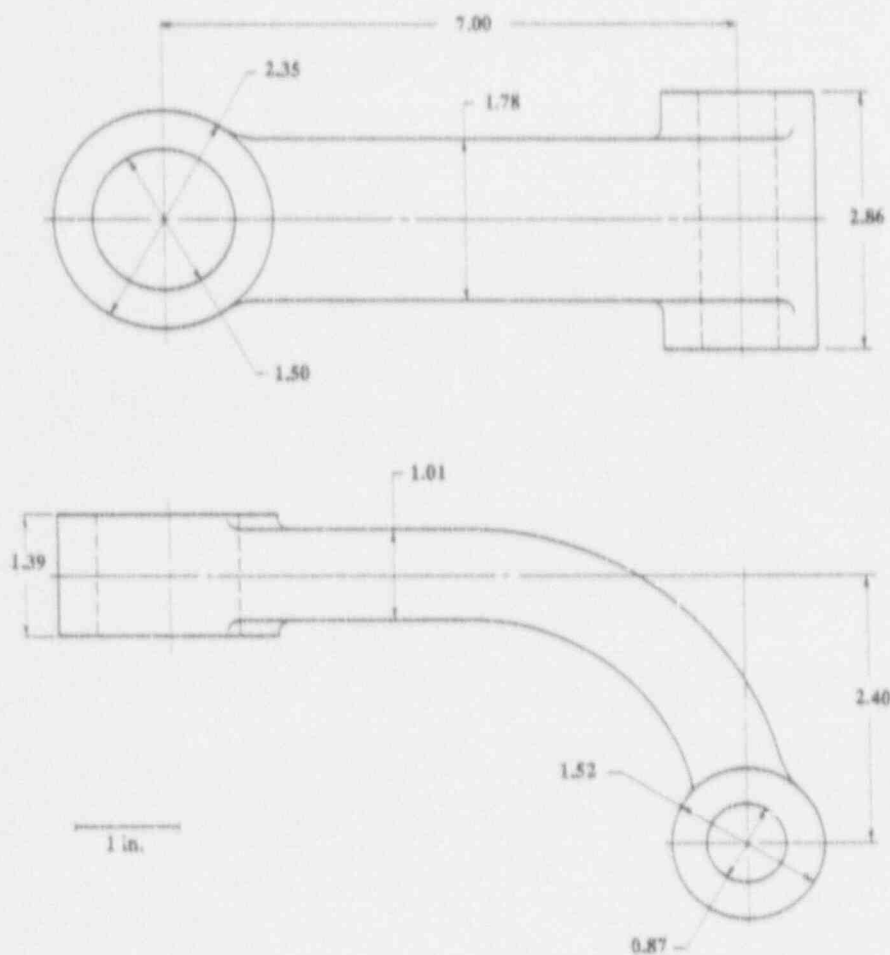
SAMPLE NO. 255, 10-INCH CHECK VALVE.
